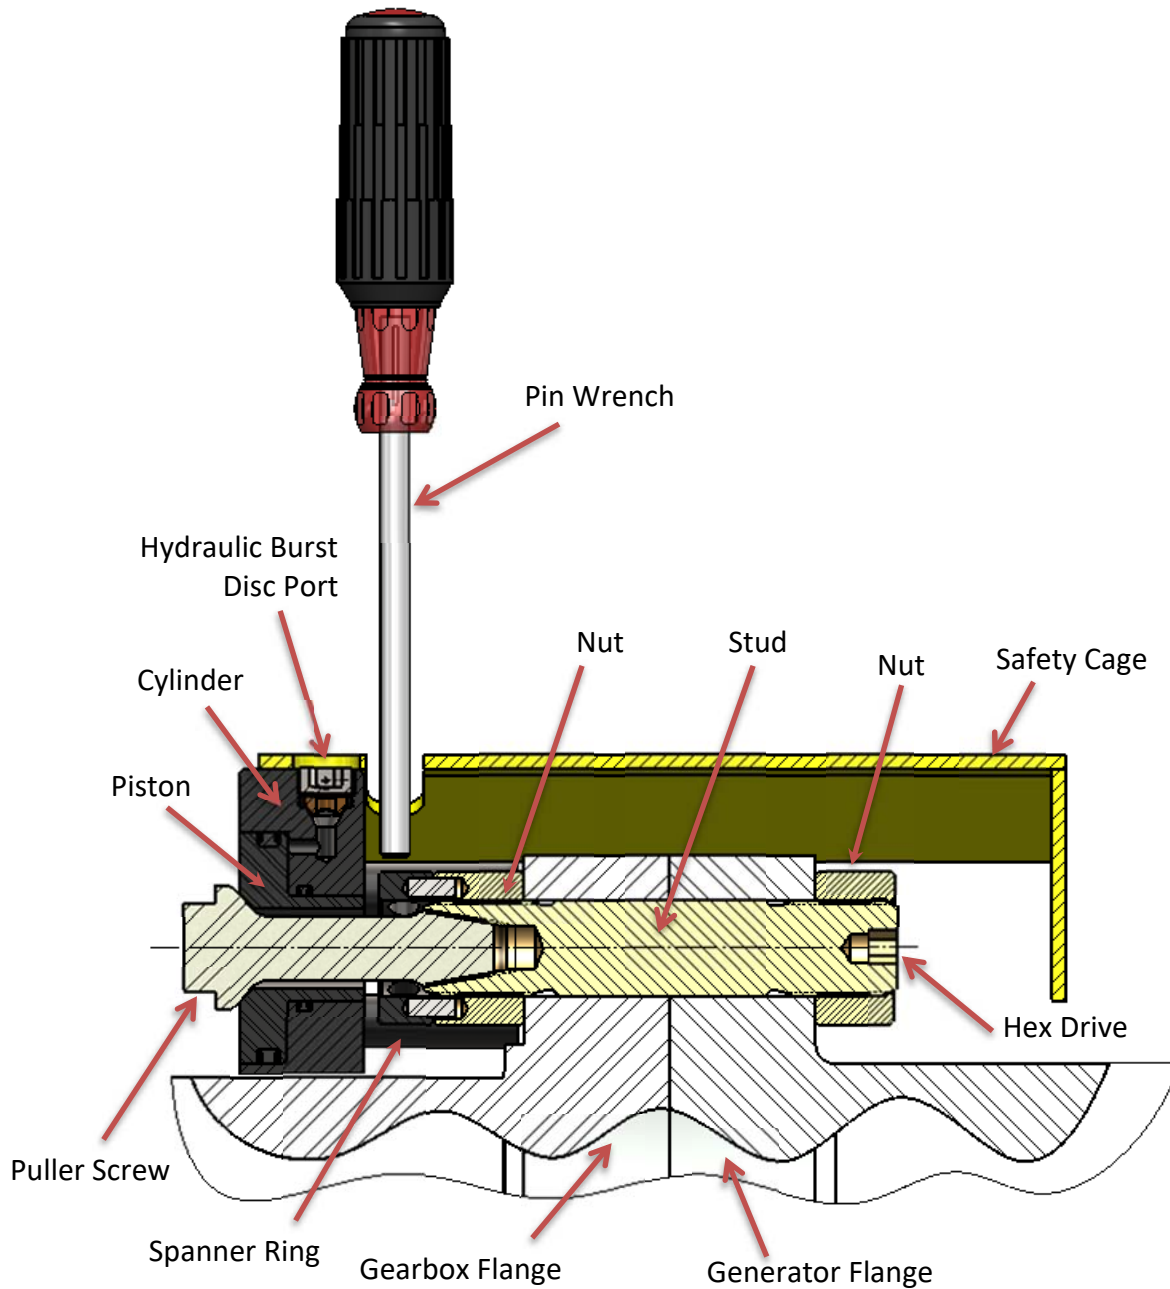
D – Cross-section View of HT-5618 on 6B Gas Turbine Load Coupling Flange
